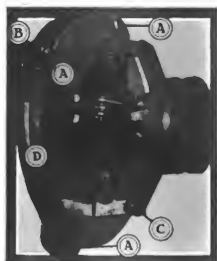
Jackson plate clutch, engaged through a toggle motion, with soft but positive action and easy adjustment
